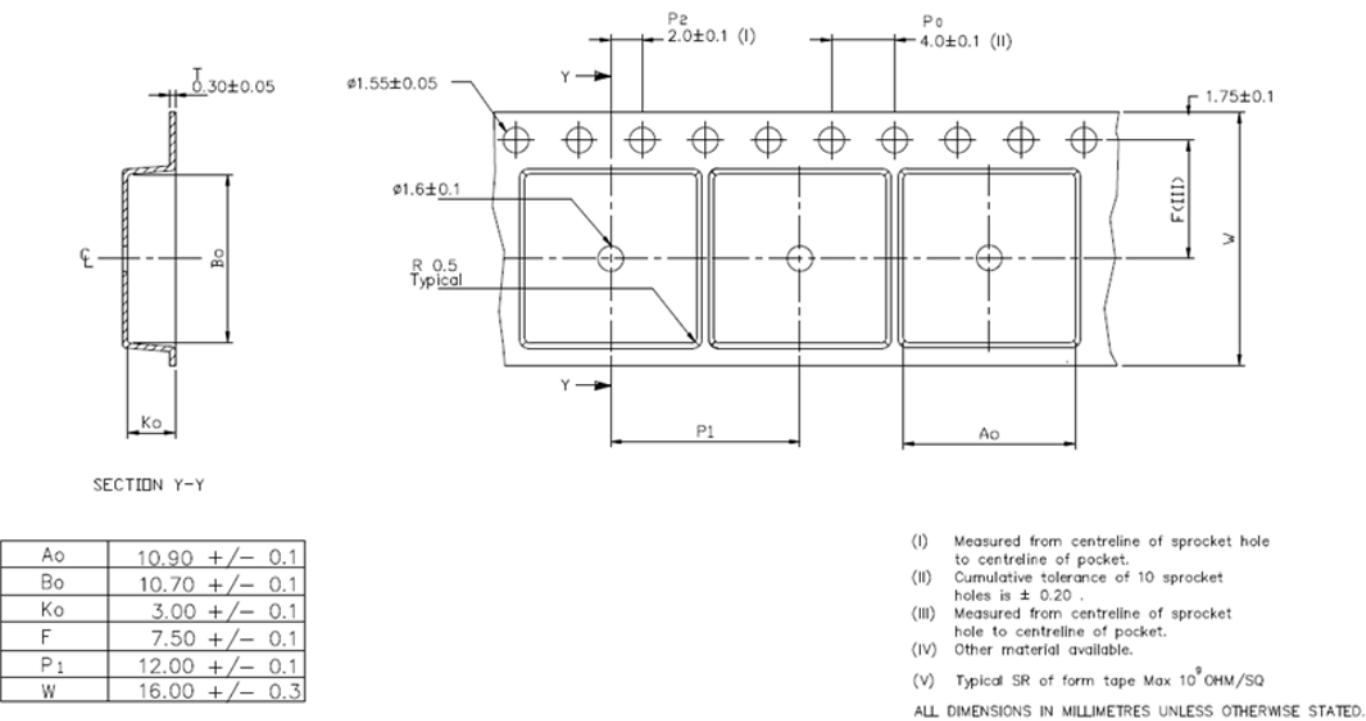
Tape and Pocket Drawing for SOICW-16 Package
